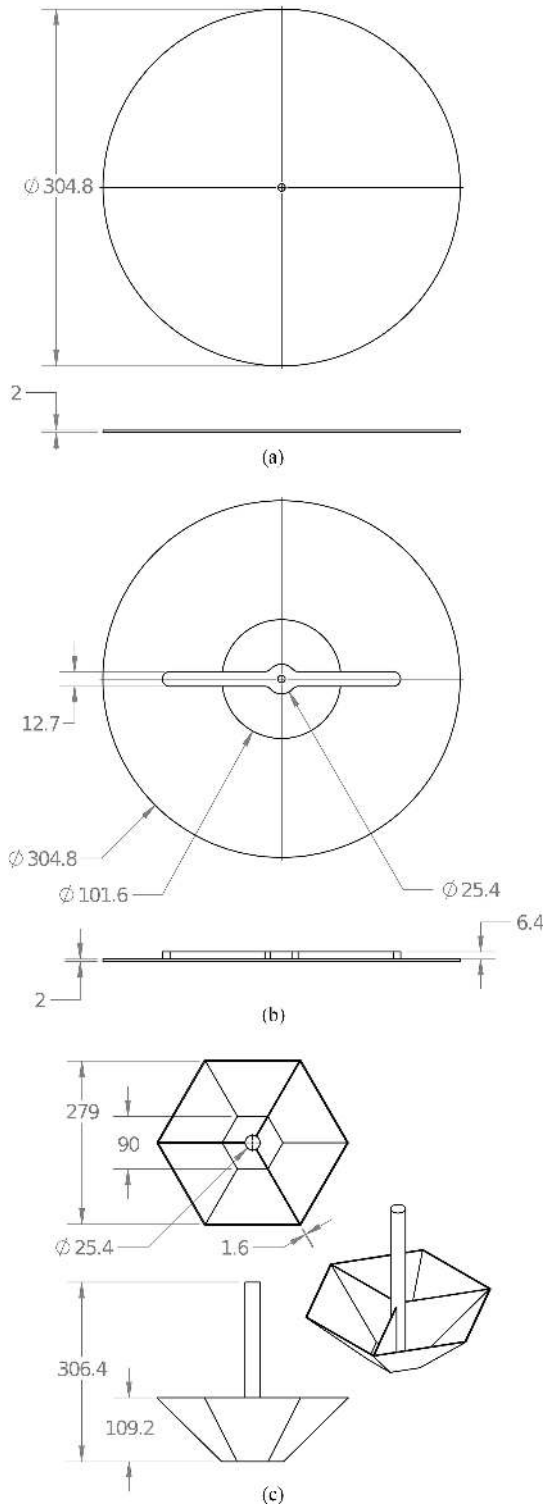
Heave plates used on the Oscillator: (a) flat plate, (b) flat plate with central hole, and (c) hexagonal conic, tested with the lower hole open and closed. All dimensions are in units of millimeter.
